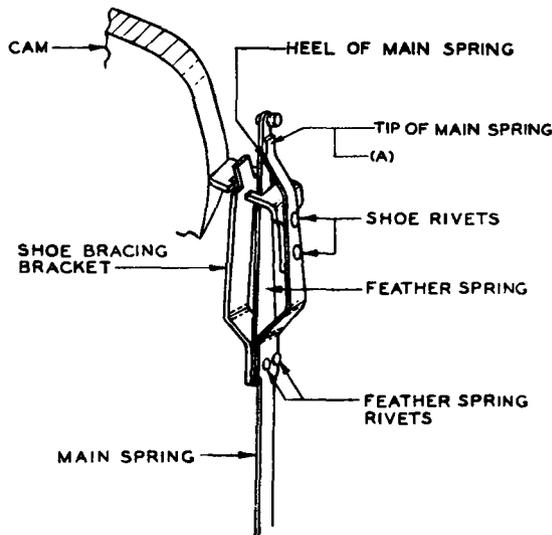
Feather Spring Assembly With Shoe Bracing Bracket
